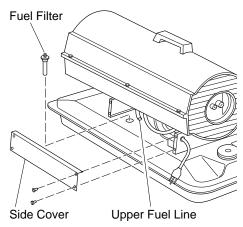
Fuel Filter Removal 40,000 & 60.000 Btu/Hr Models
